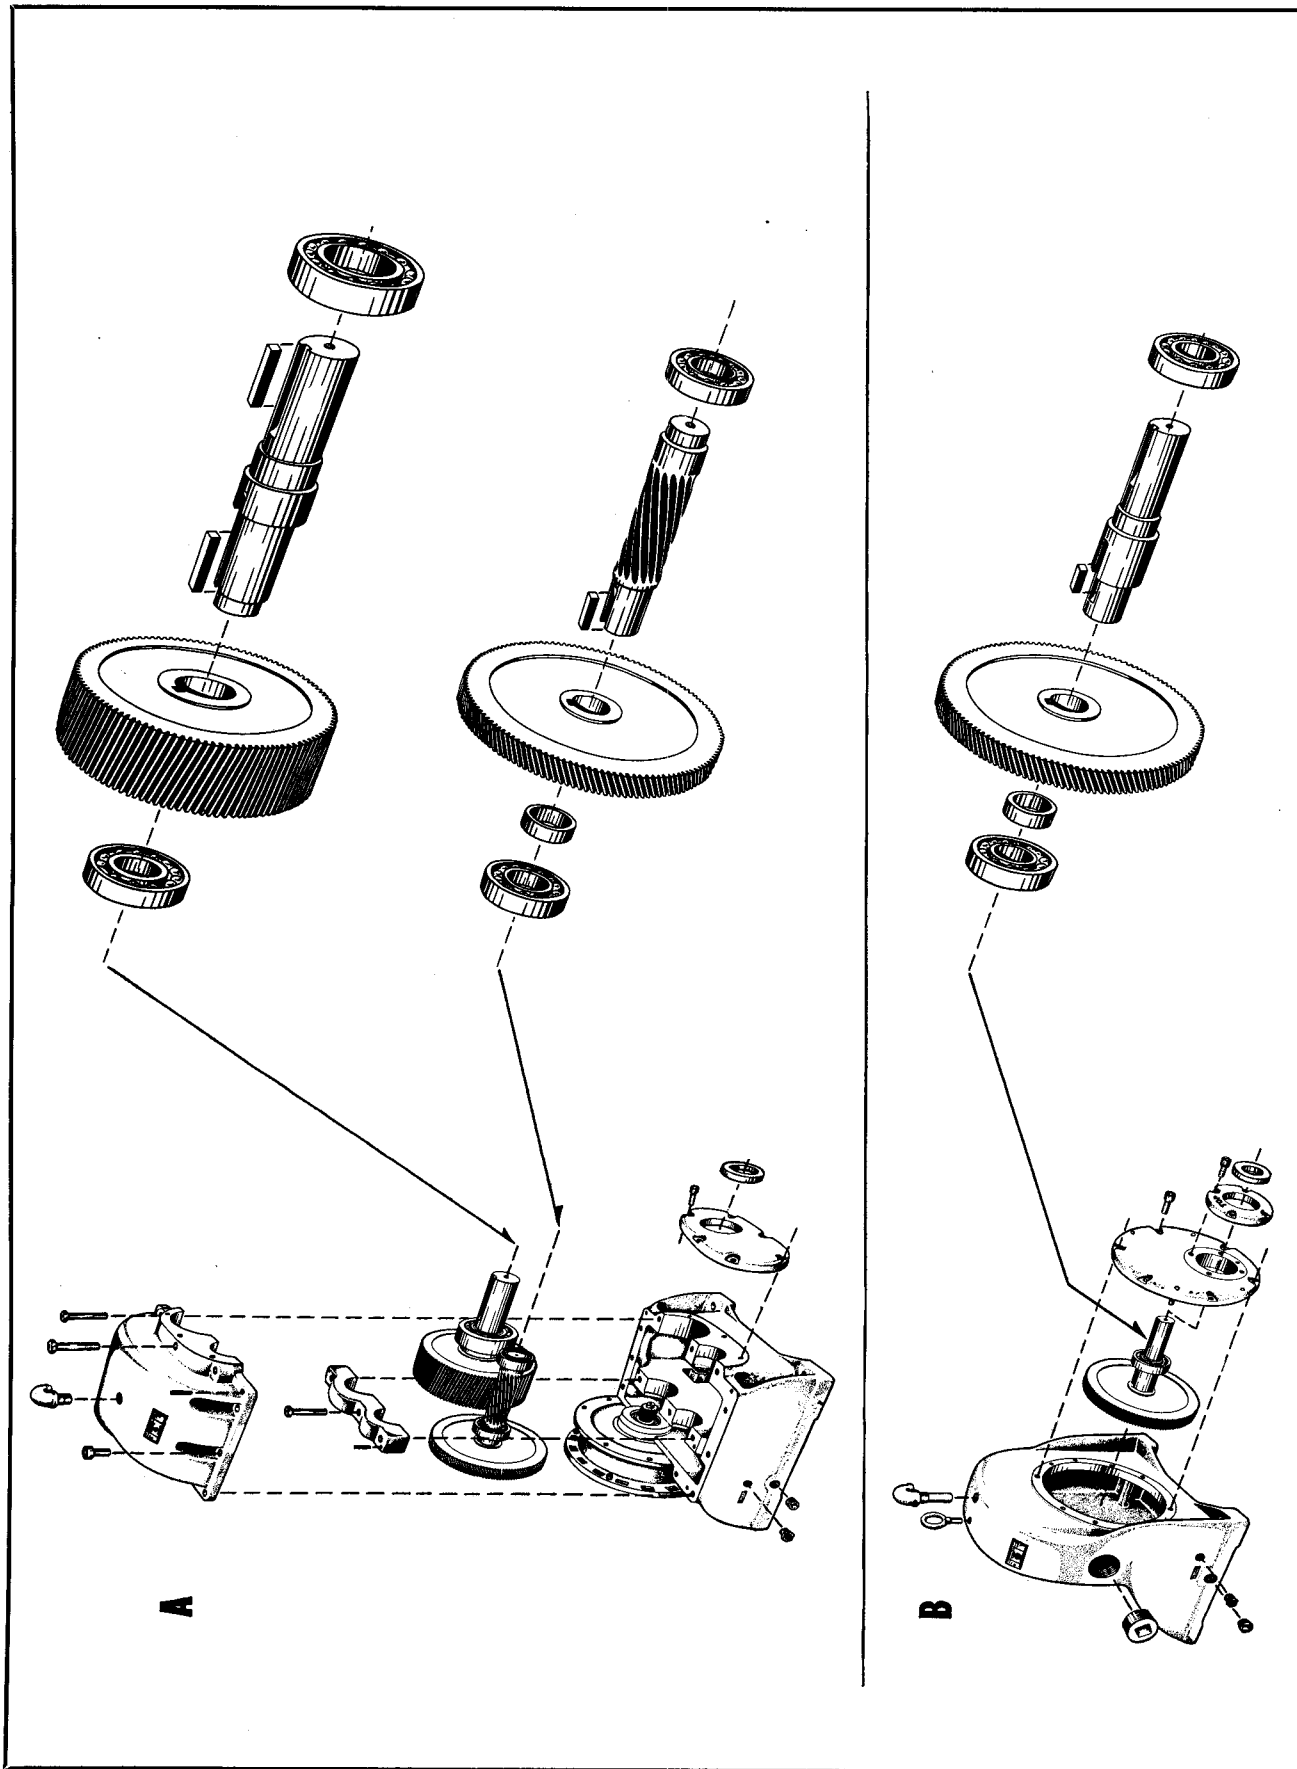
Arrangement of Parts—(A) Double Reduction Geared Drive, Types C and E; (B) Single Reduction Type A.
